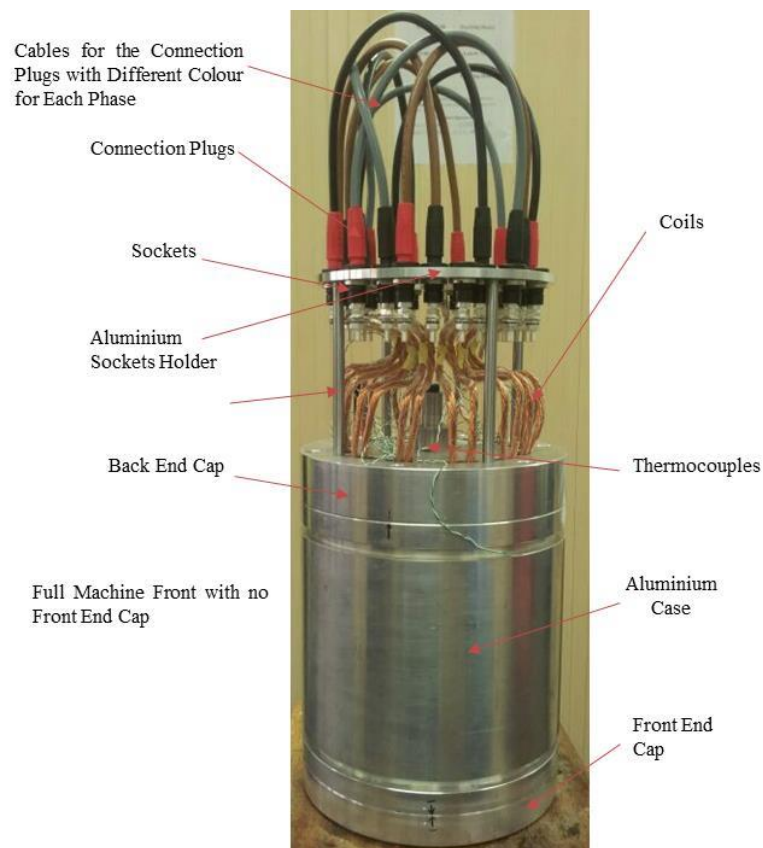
Final Case Assembly with the Final Winding Connection Box.
